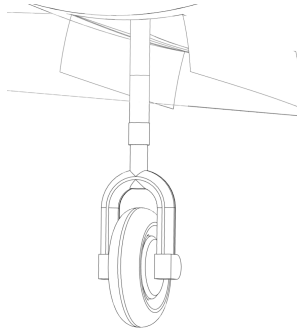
Gear retraction mechanism found on wing mounted landing gears [44]
